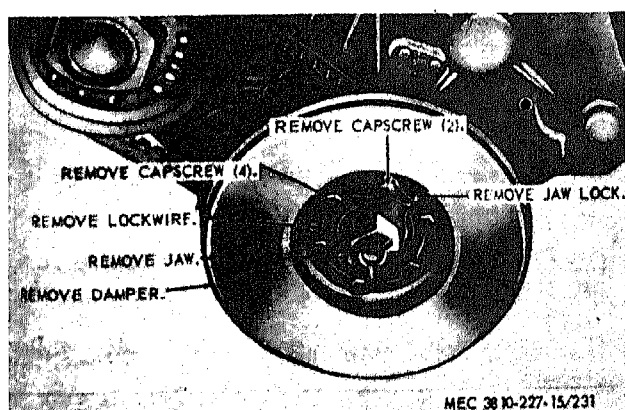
Carrier engine vibration damper and pulley assembly, removal and installation.
